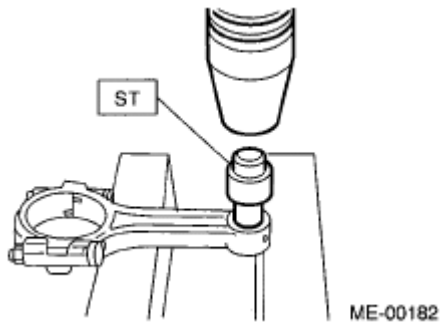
Identifying Connecting Rod Bushing Remover And Installer ST499037100
